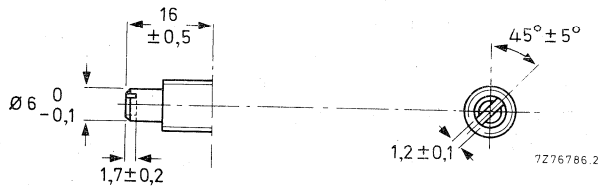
Spindle with screwdriver slot; spindle fully counter clockwise.
